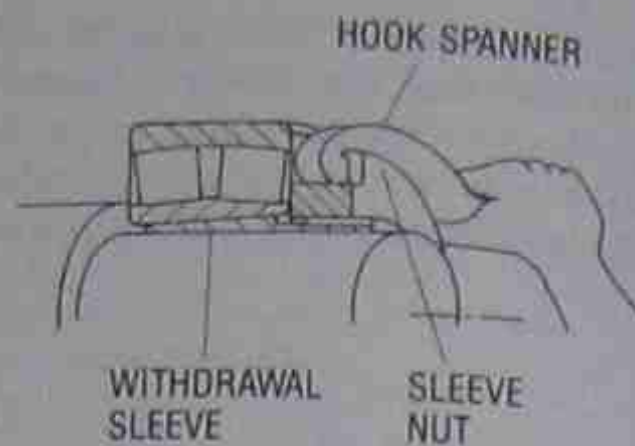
Forcing out the sleeve with a hook spanner.
